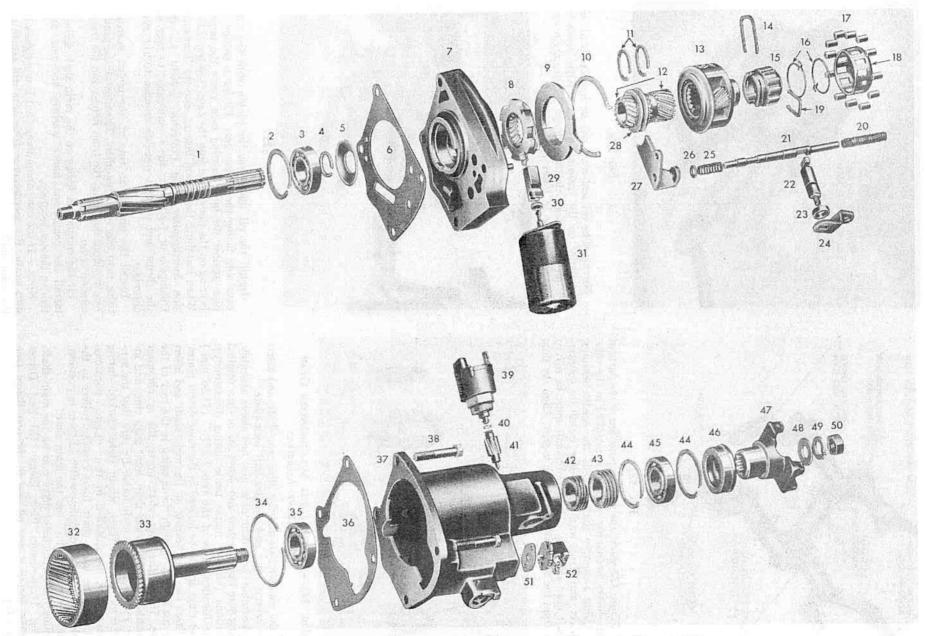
Parts of the Champion and Commander Overdrive Transmission
